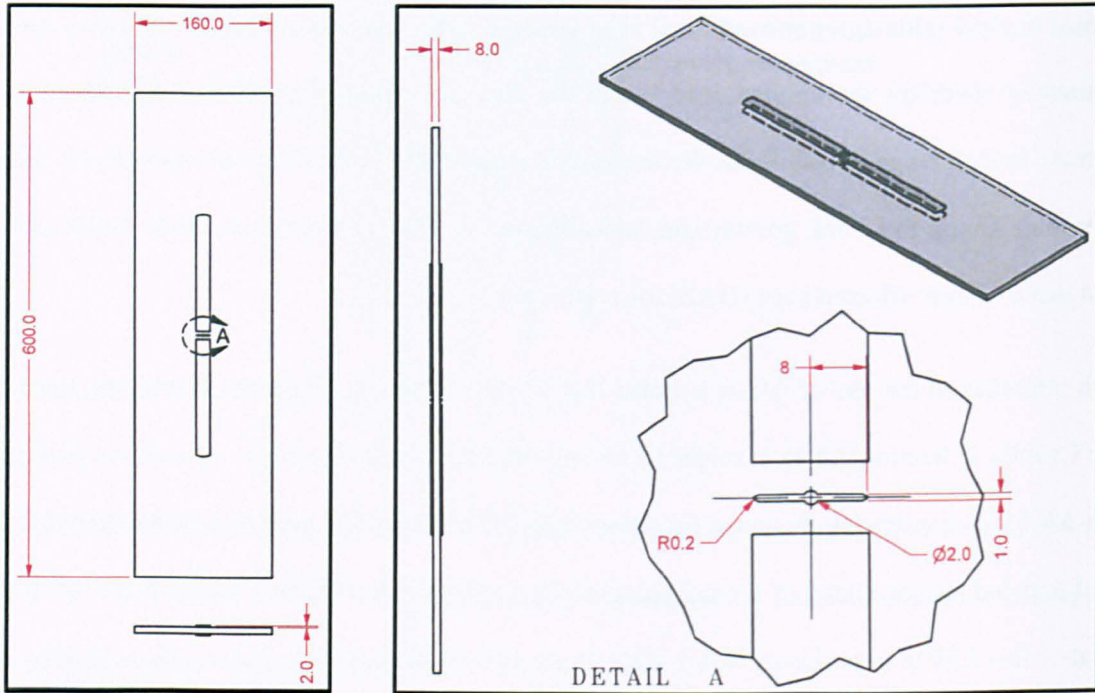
Detailed drawing of a centre crack tension specimen showing the notch dimensions (weld beads also shown).
